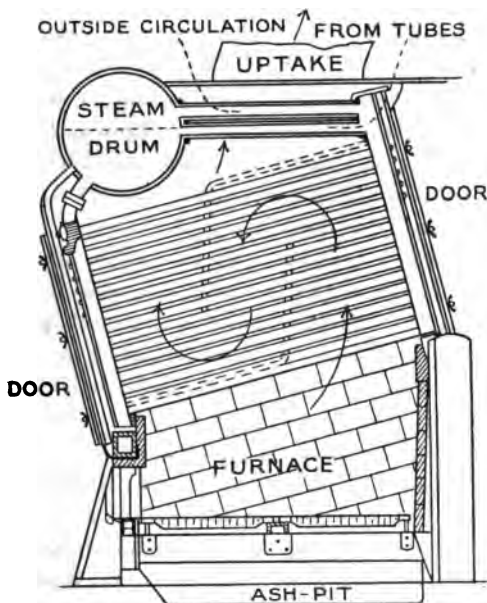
Babcock and Wilcox Marine Type Boiler.
